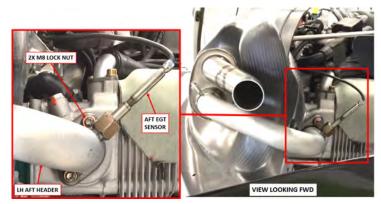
AFT EXHAUST HEADER AND EGT SENSOR
